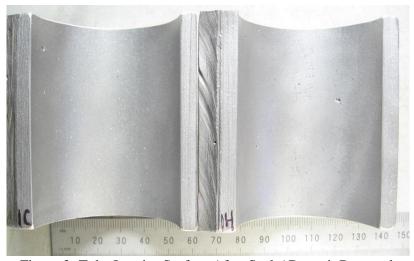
Tube Interior Surface After Scale/ Deposit Removal.
